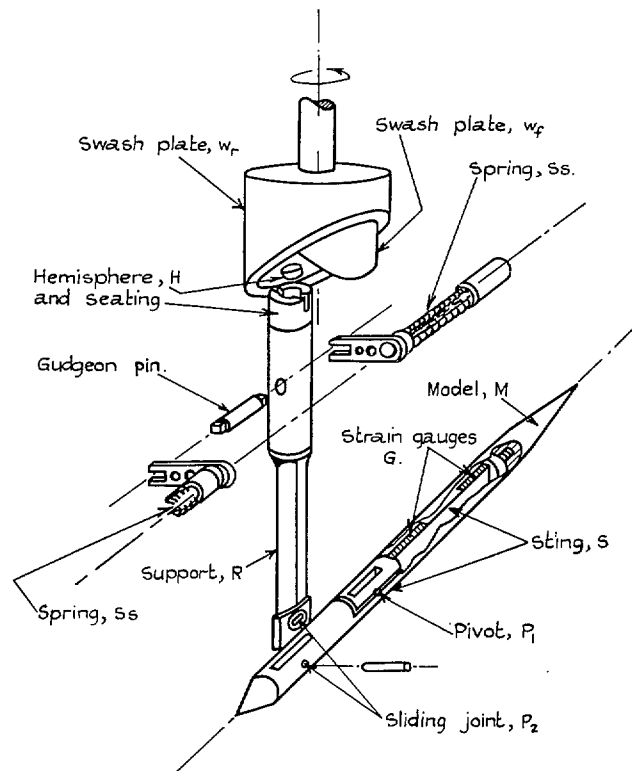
Exploded view of drive and supports, etc. (Front support omitted for clarity).
